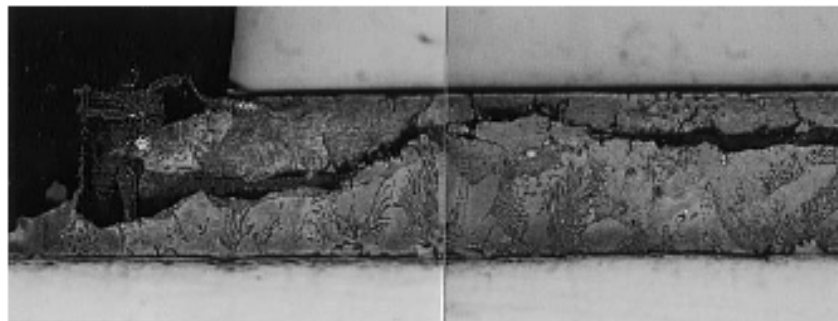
Solder fatigue crack propagation [6]
